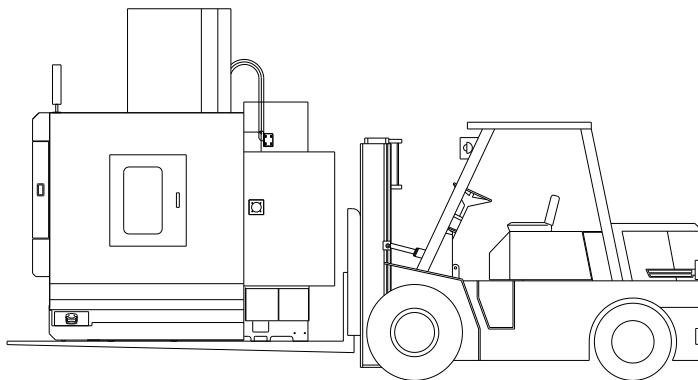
Handle the Unpackaged Machine by a Forklift
